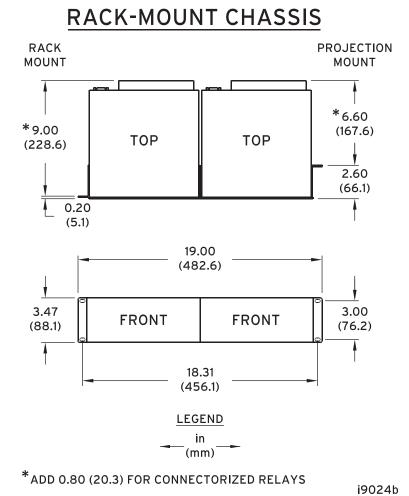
Relay Dimensions and Drill Plan for Mounting Two SEL-500 Series Relays Together Using Mounting Block (SEL P/N 9101)
